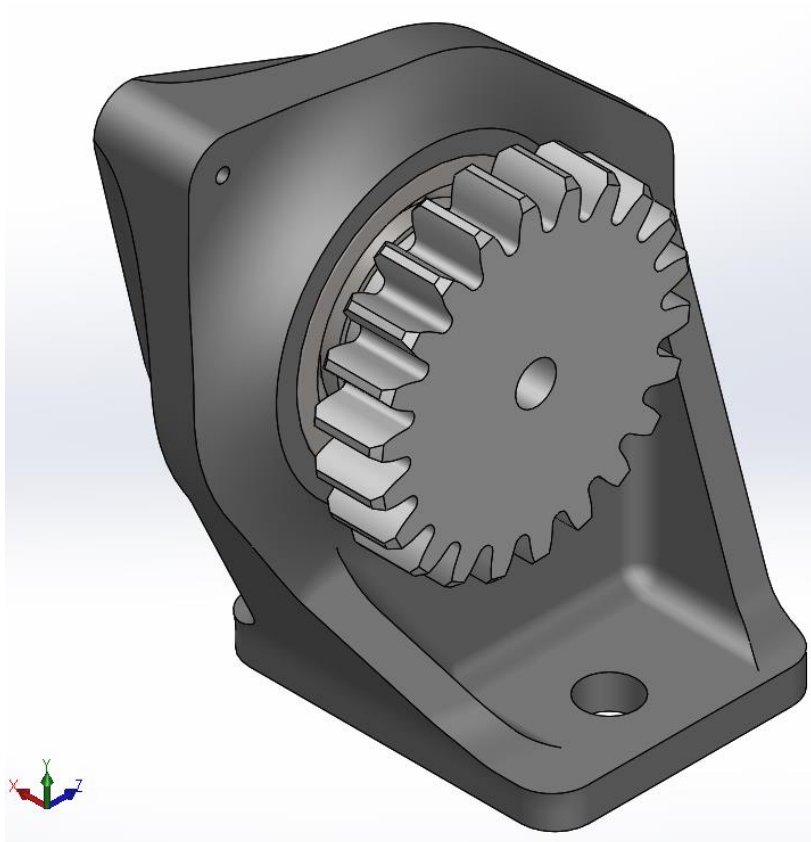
CAD drawing of the coupling between the support for the encoder and the spur gear wheel
